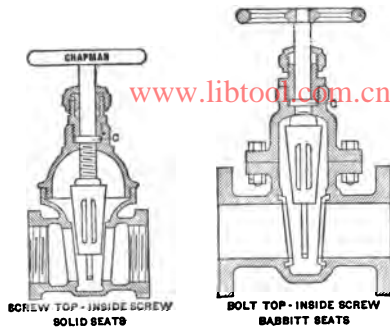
Screw Top, Inside Screw, Solid Seats; Bolt Top, Inside Screw, Babbitt Seats.
